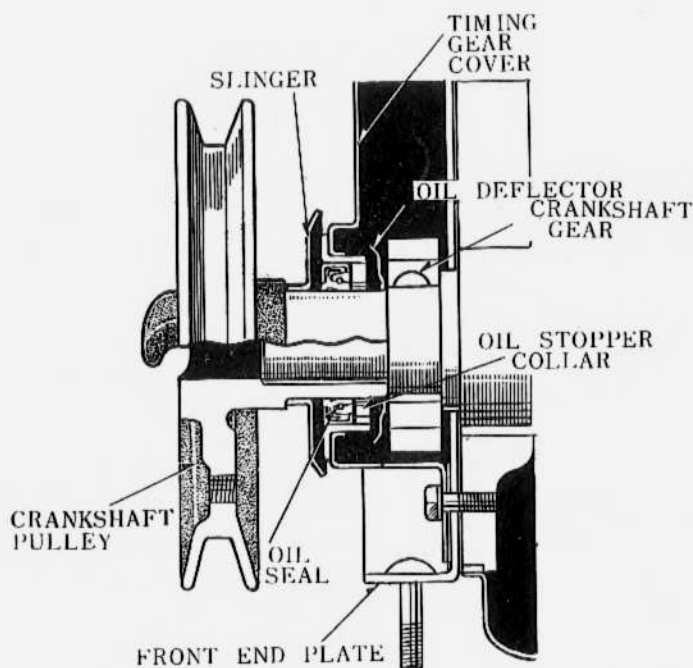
Timing Gear Cover and Crankshaft Pulley Assembly
